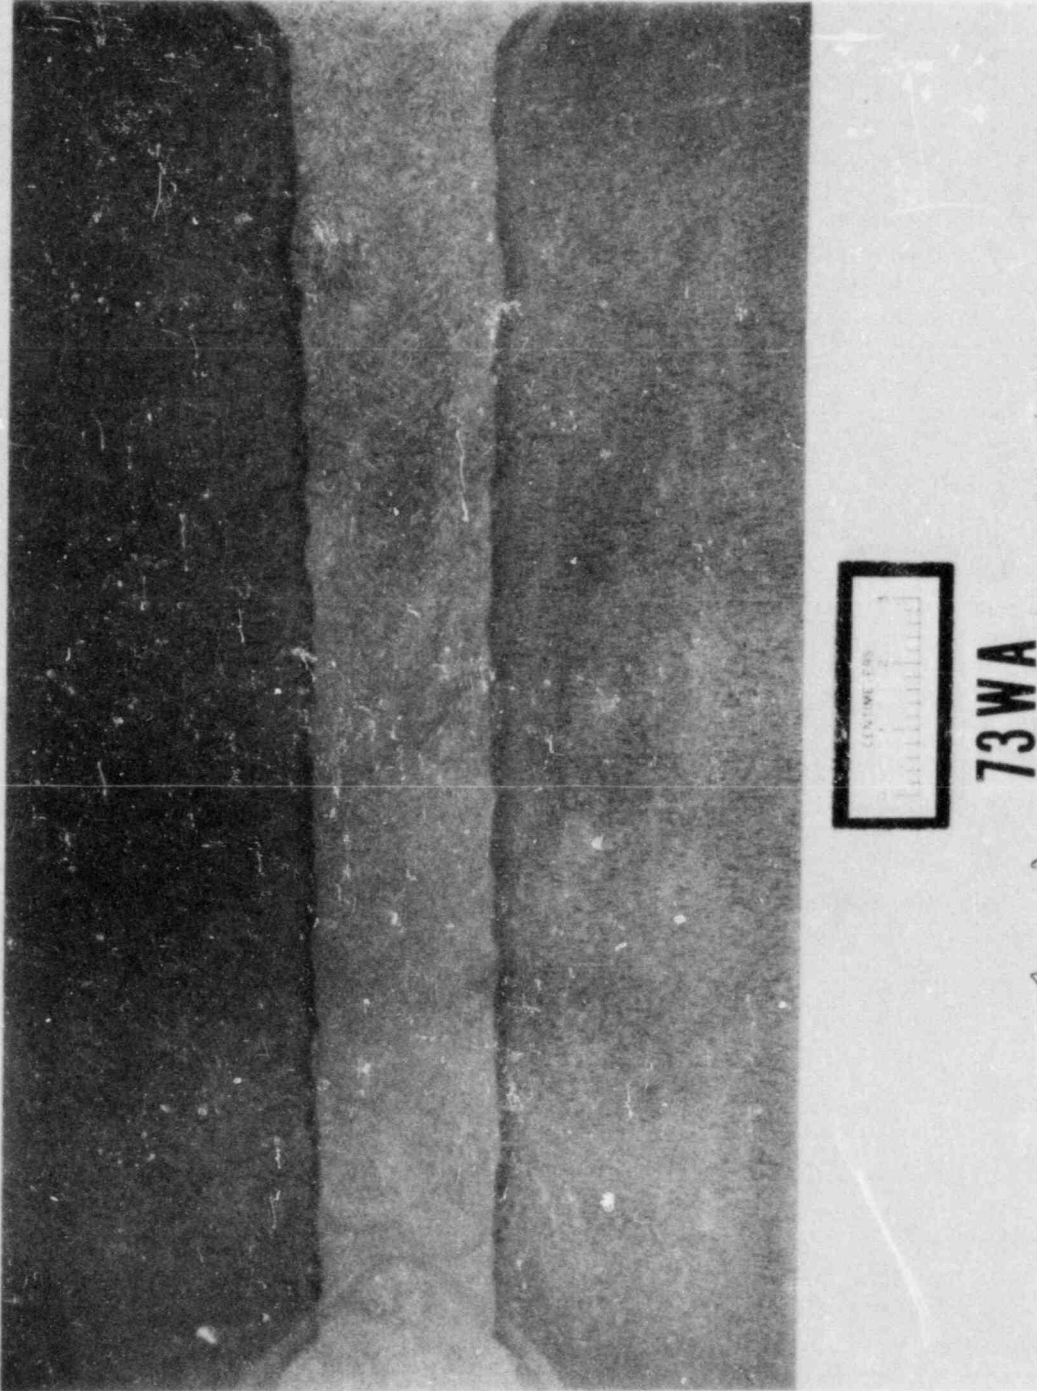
Macroetched cross section of weldment HSST-73W.
